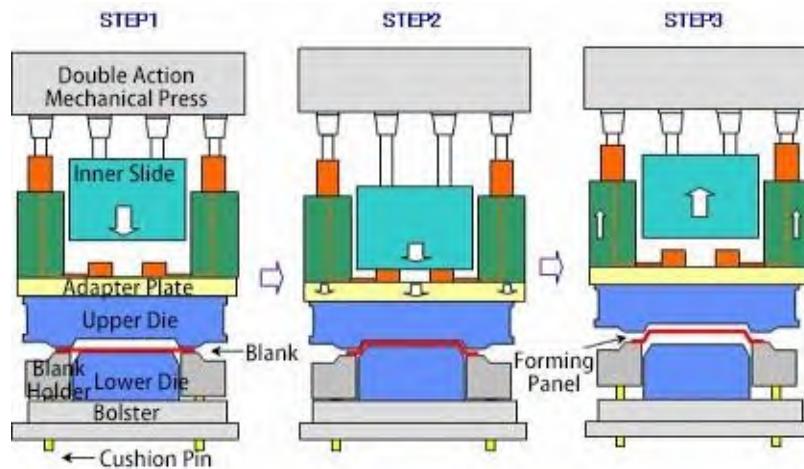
Dies in hydraulic double action deep drawing presses [14].
